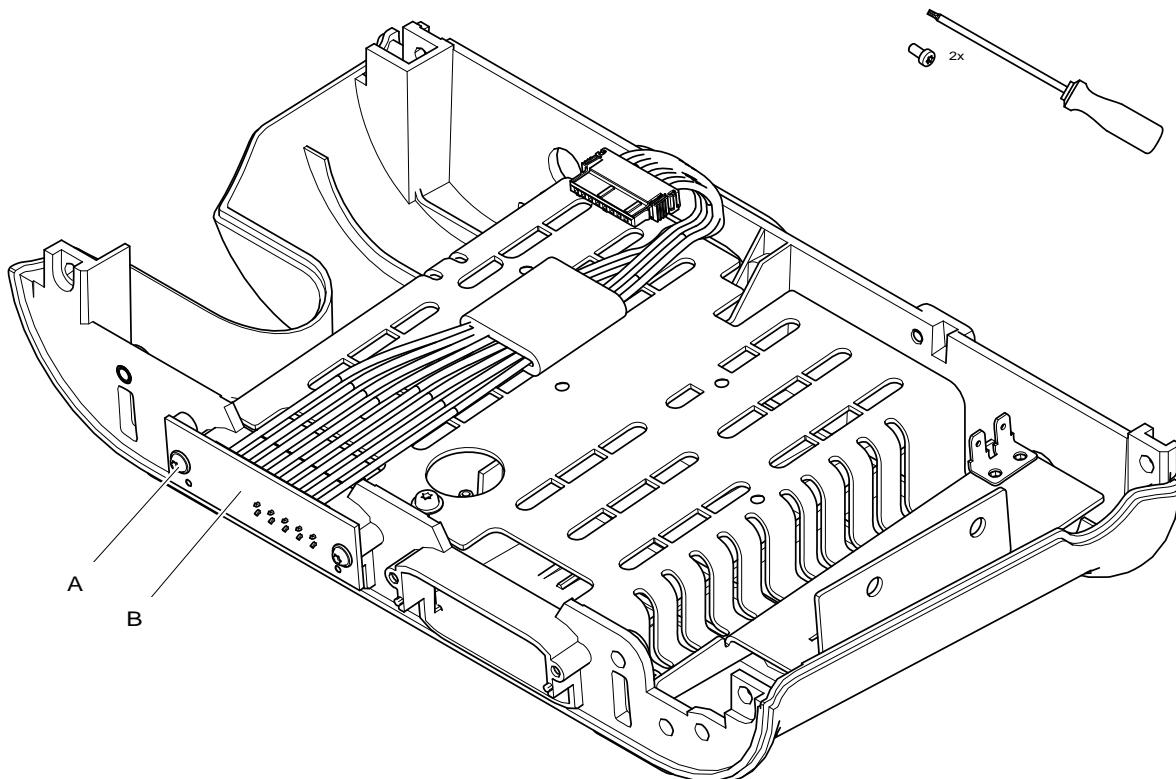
Battery Connector Board Removal/Assembly HAMILTON-C1 <SN6000
